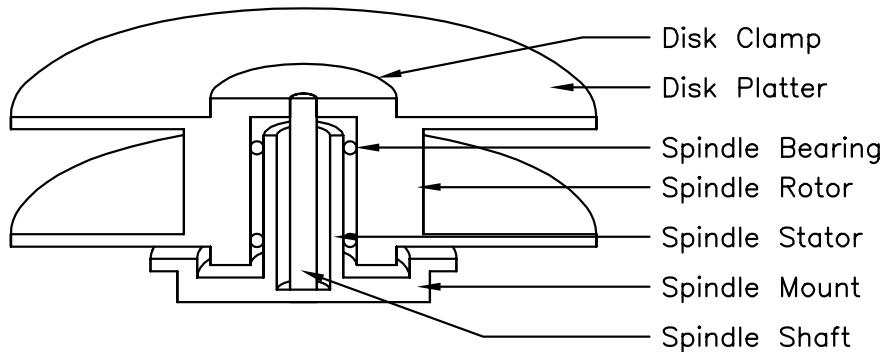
Disk stack assembly containing the disk platters, spindle assembly, and spindle shaft.
